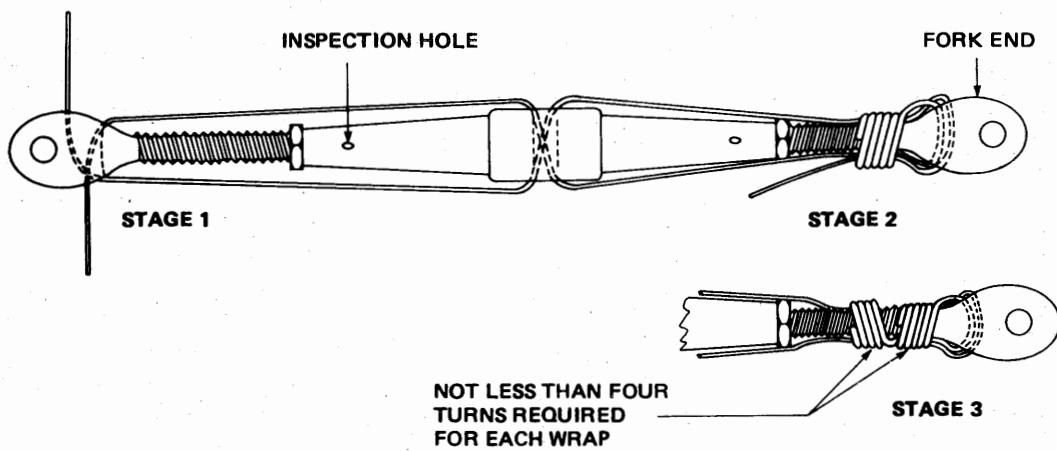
ALTERNATIVE METHOD OF WIRE-LOCKING TURNBUCKLE WITH FORK END-FITTINGS
